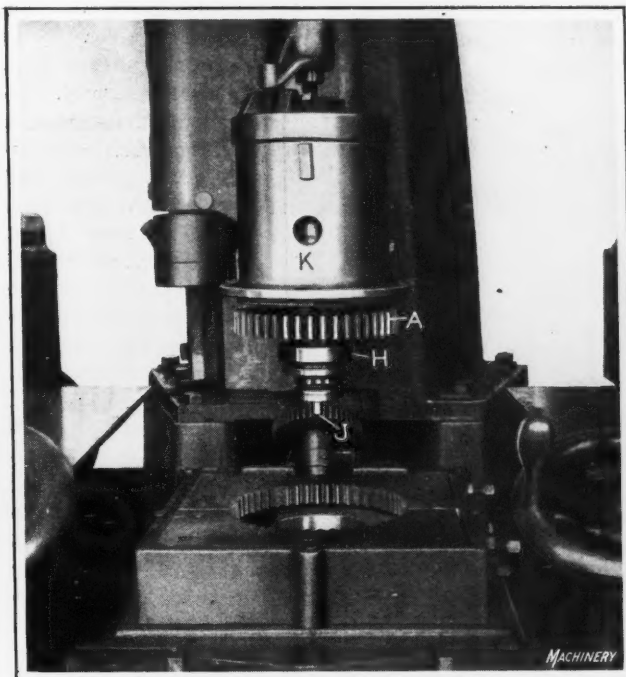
Master Gear A and Toothed Track below, which governs Action of Master Gear and Work
